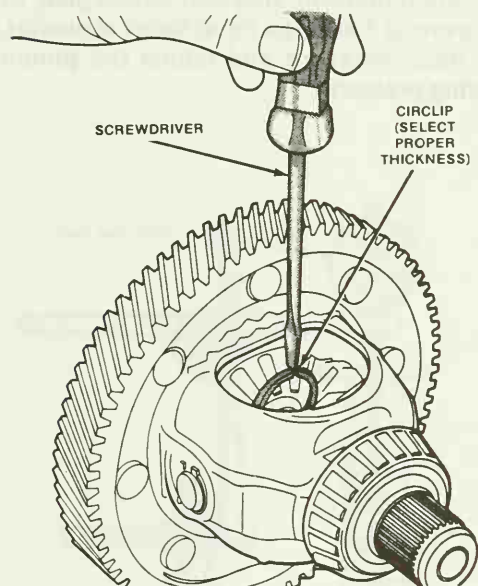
The thickest possible circlip is used to remove axle shaft end play. (Chrysler Corporation)
